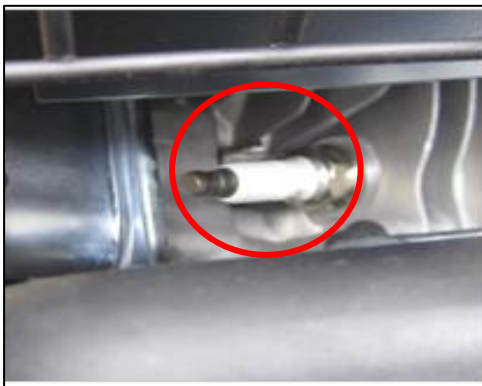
Manually insert and thread new spark plug. Use spark plug wrench to tighten.
